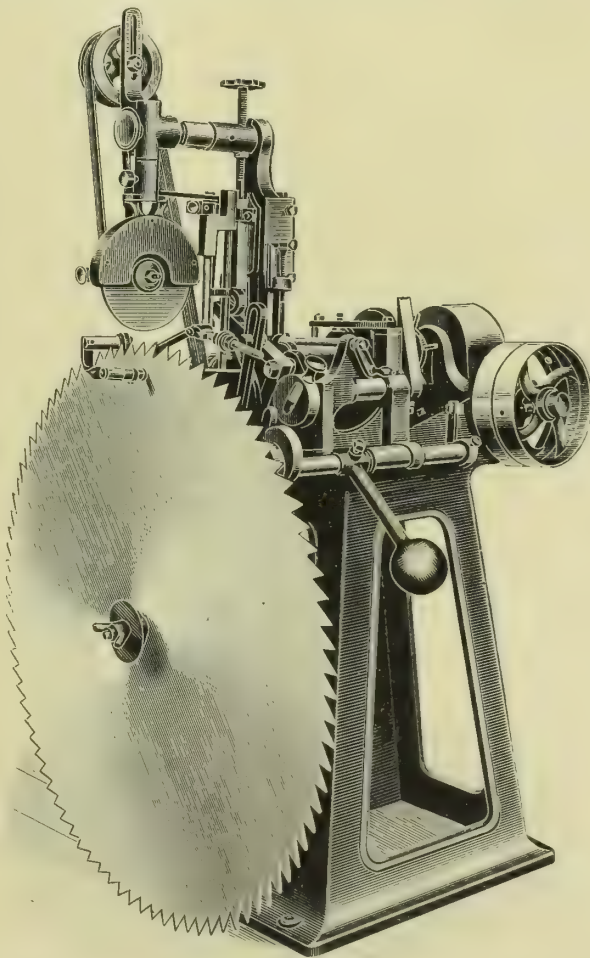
AUTOMATIC SAW SHARPENING MACHINE. MESSRS. THE BRITISH SAW SHARPENING MACHINES, LTD., LONDON.
